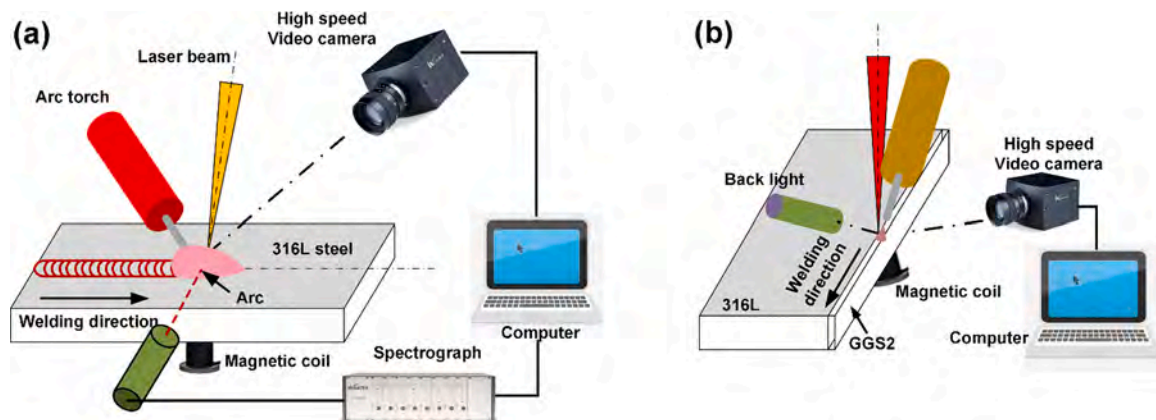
Monitoring schematic of laser-MIG hybrid welding under alternating magnetic field: (a) acquisition of welding plasmas; (b) the "sandwich" method.
